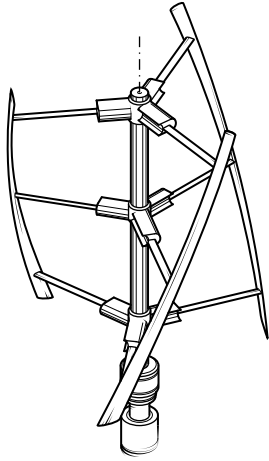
Sketch of a rotor with hollow strut sections extending to only part of the radius.
